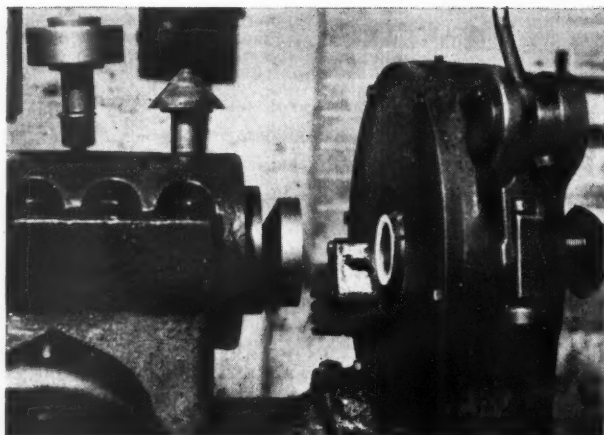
Machine for flanging copper pipe and tubing. With this equipment a flange can quickly be rolled back to a 45-deg. angle in reverse.
